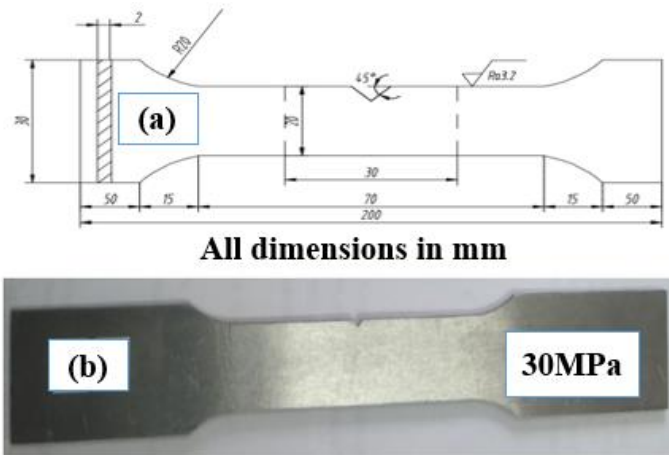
shown specimen of AA7075-T6: a) Dimension and b) photo
